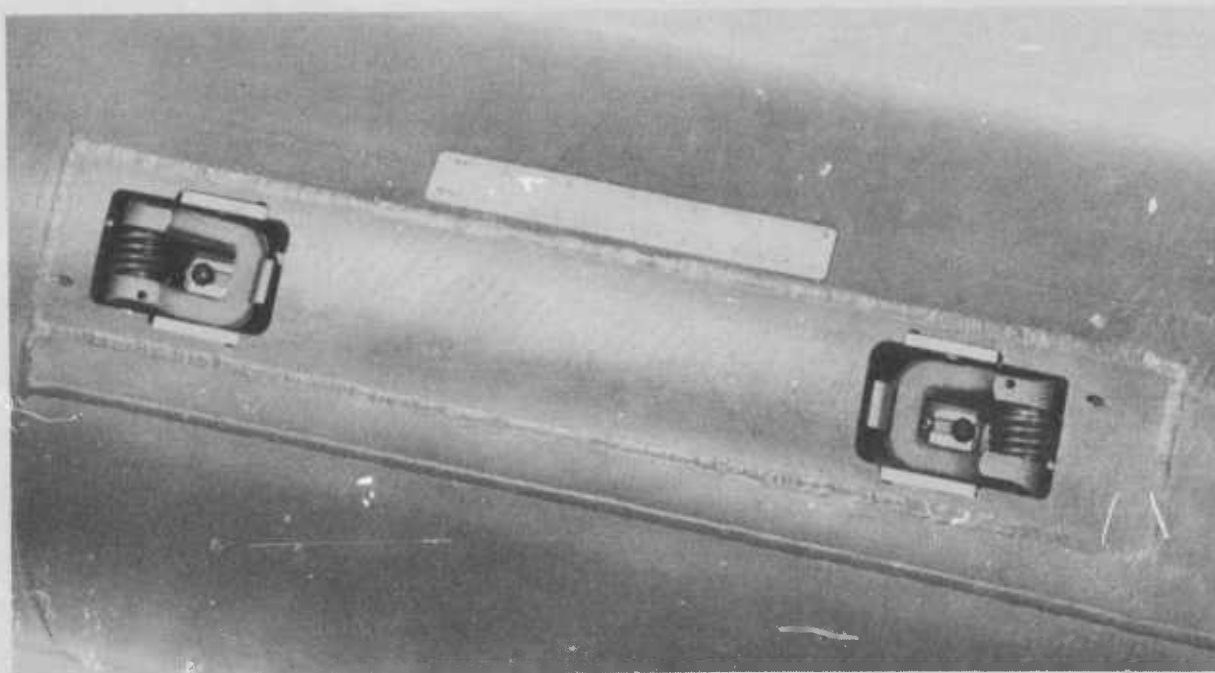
Fuel Tank Assembly Showing Suspension Lugs
